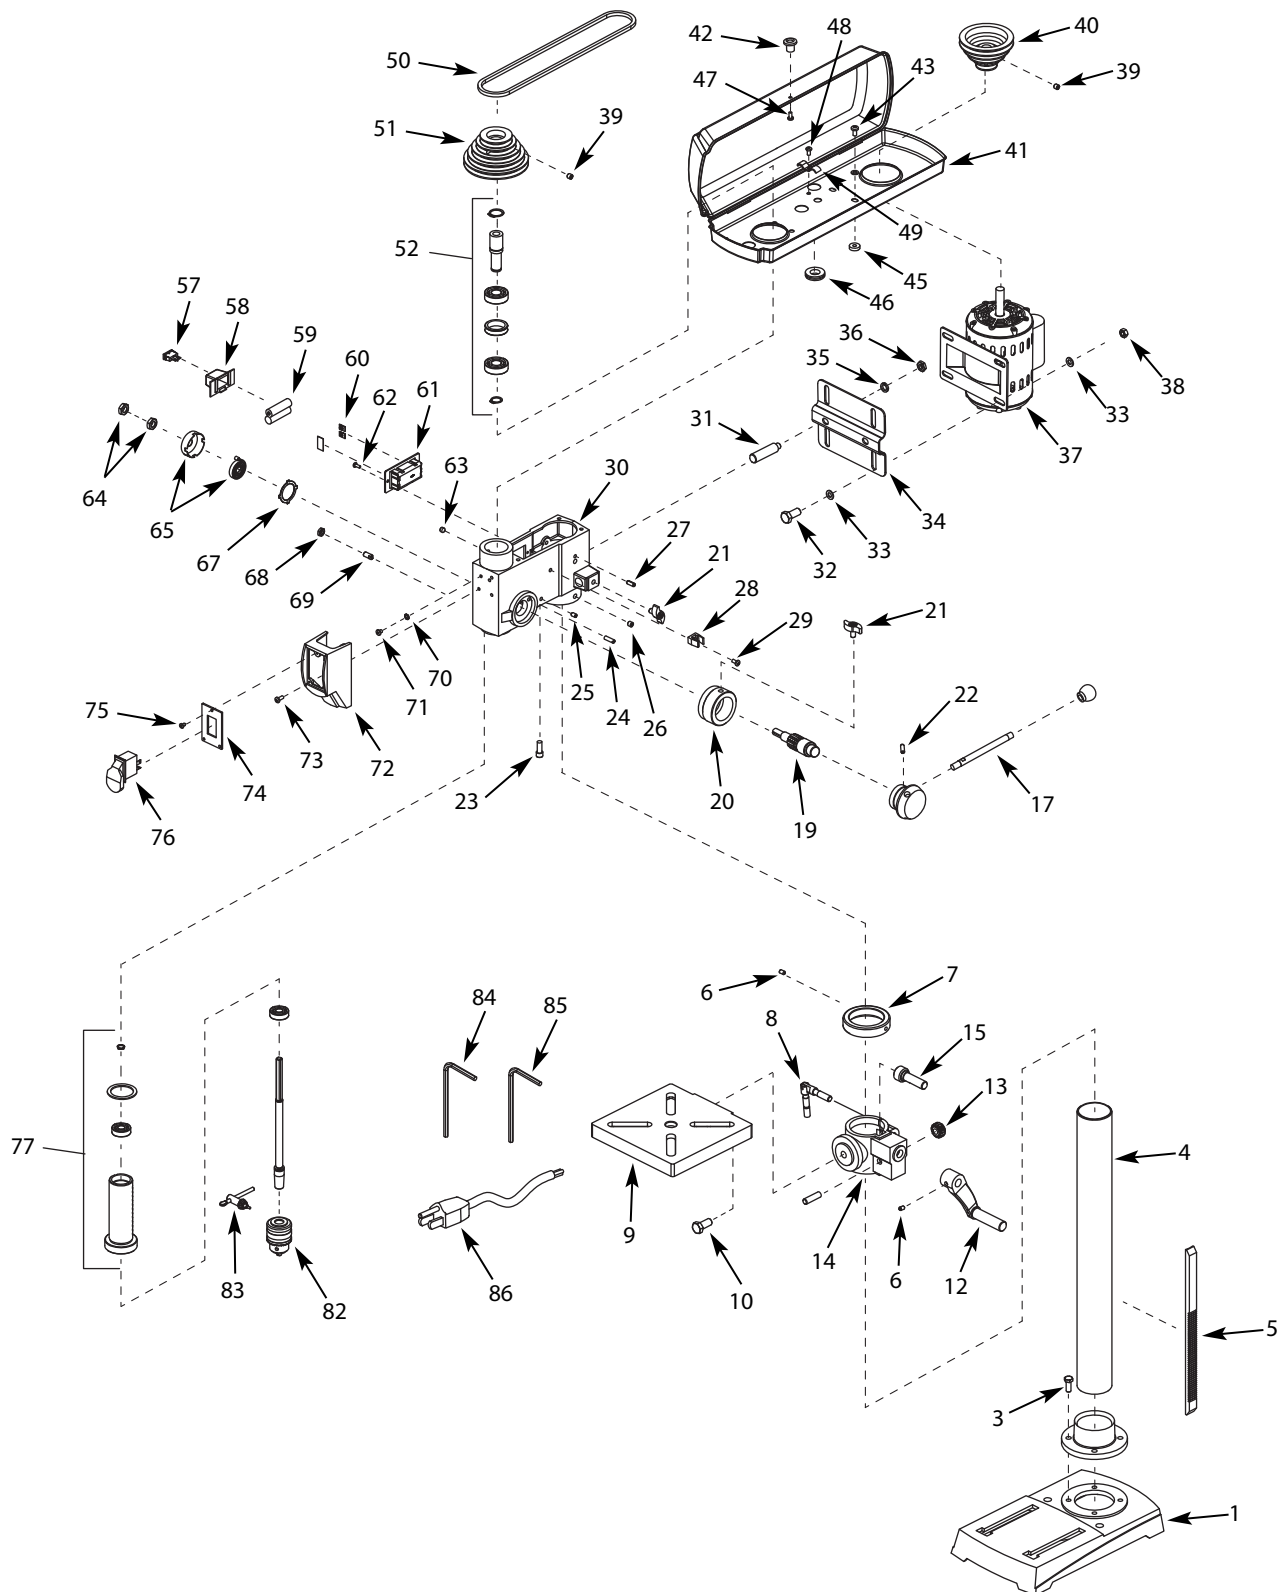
Replacement parts illustration for 9680100C 10" Bench Model Drill Press.
